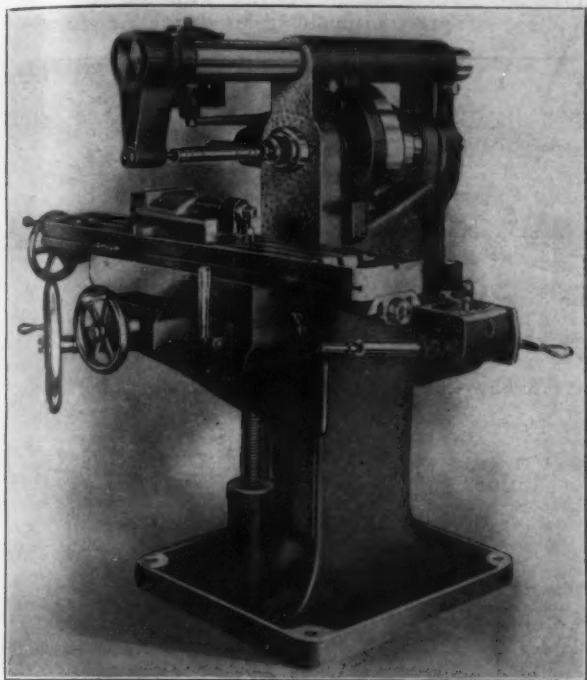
General View of a New Plain Miller Built by the Grand Rapids Machine Tool Company, Grand Rapids, Mich.
